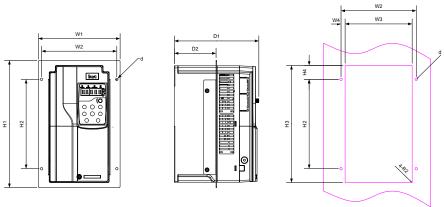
380V 11- 22kW VFD flange mounting diagram
